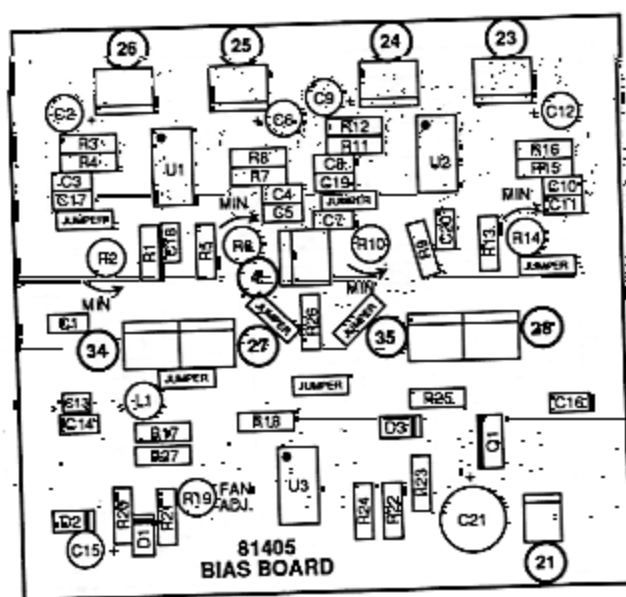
81405 POWER AMP. BIAS BOARD COMPONENT LAYOUT
